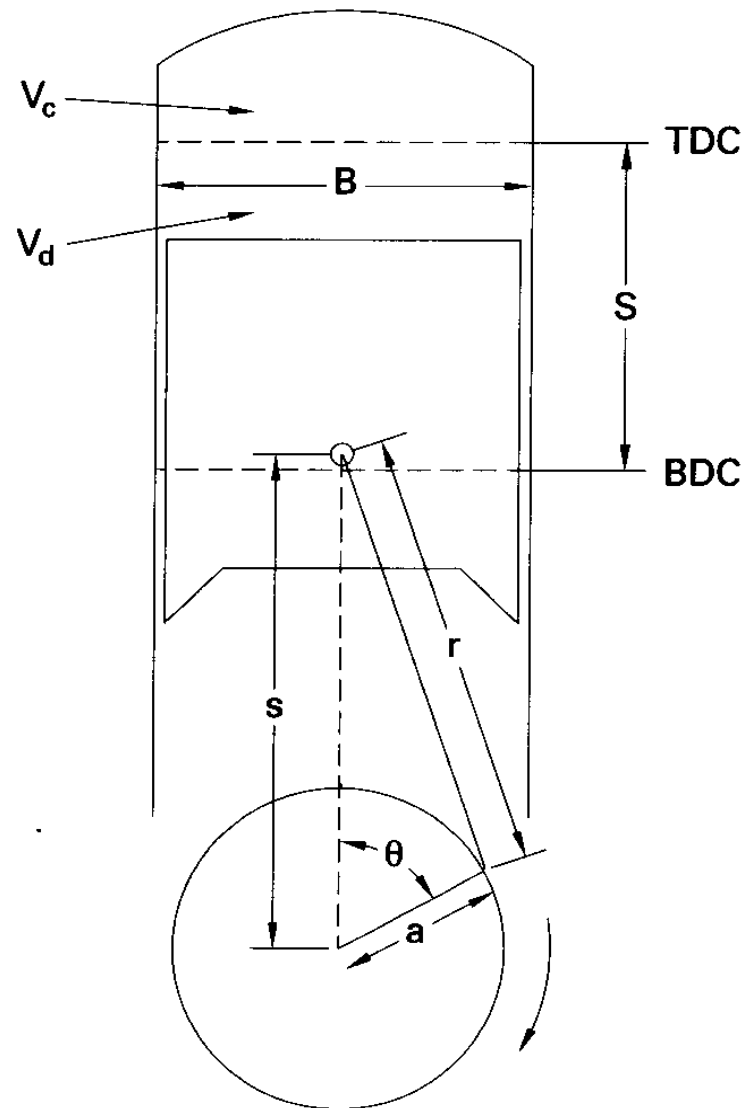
Piston and cylinder geometry of reciprocating engine. B = bore; S = stroke; r = connecting rod length; a = crank offset; s = piston position; θ = crank angle; V_c = clearance volume; V_d = displacement volume.
